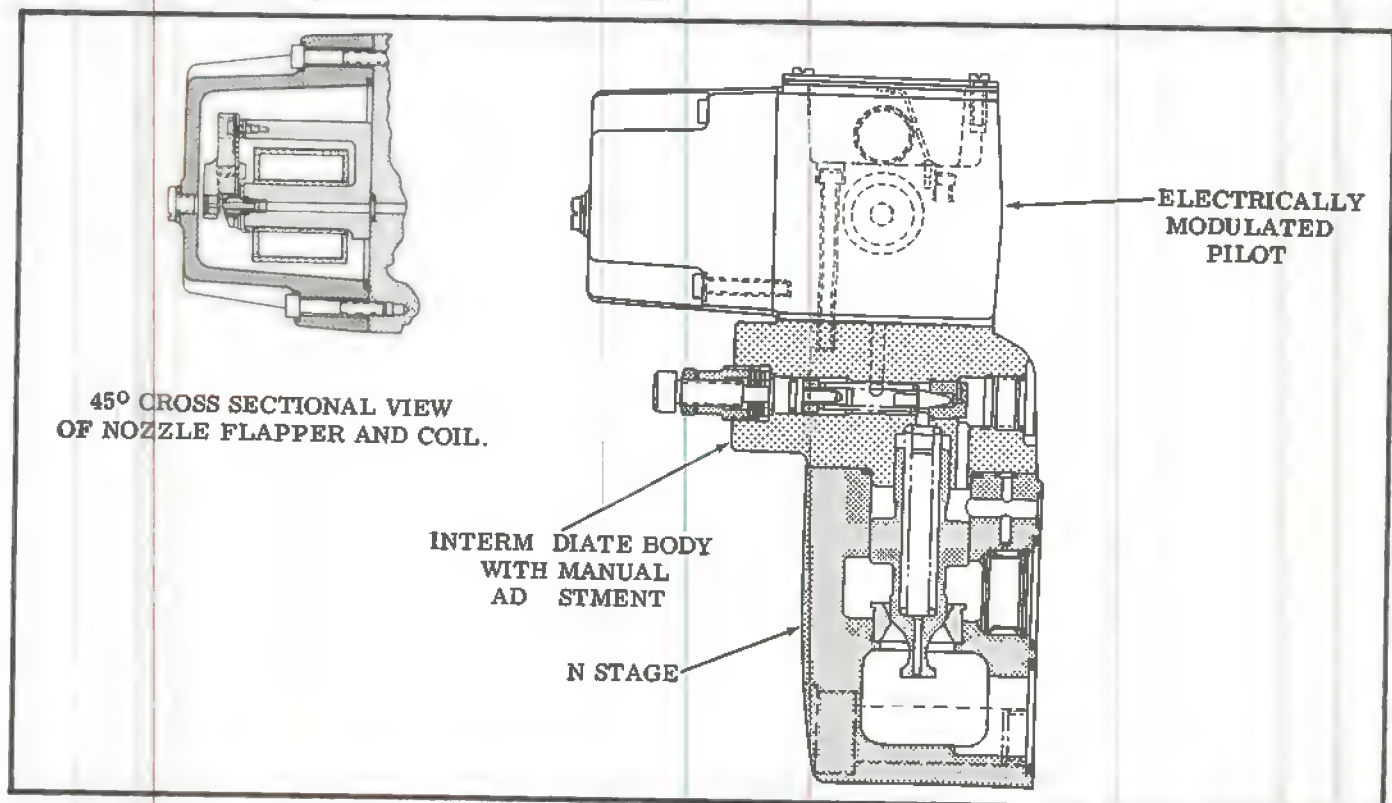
Remote Electrically Modulated Relief Valve Assembly.
